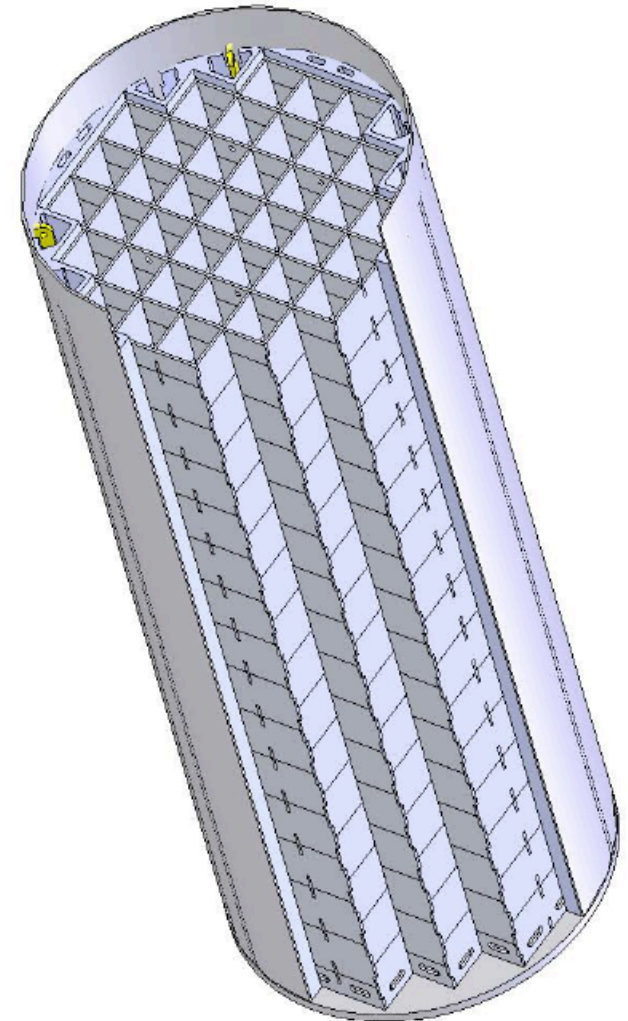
; CROSS SECTION ELEVATION VIEW OF MPC
